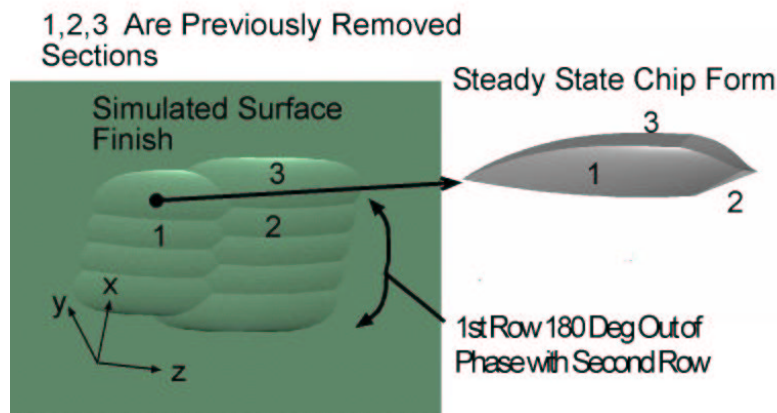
Steady State Chip Shape in 3-D Surface Machining
